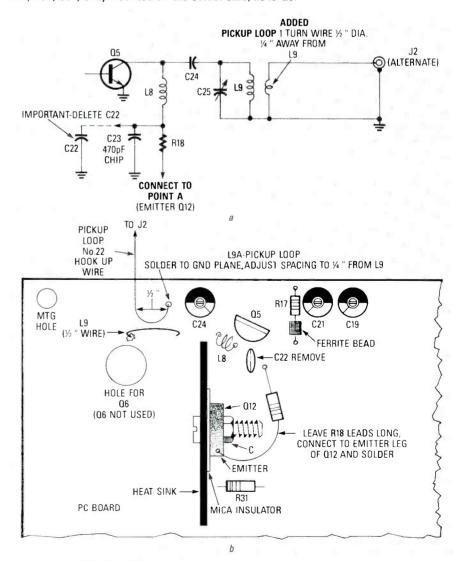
TO OPERATE THE UNIT AT LOW POWER you should follow schematic (a) and assembly modification (b).
